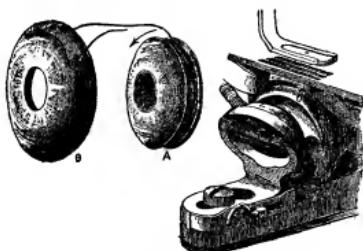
Rotary Hook, Bobbin, and Bobbin Case (Wheeler & Wilson Machine).
